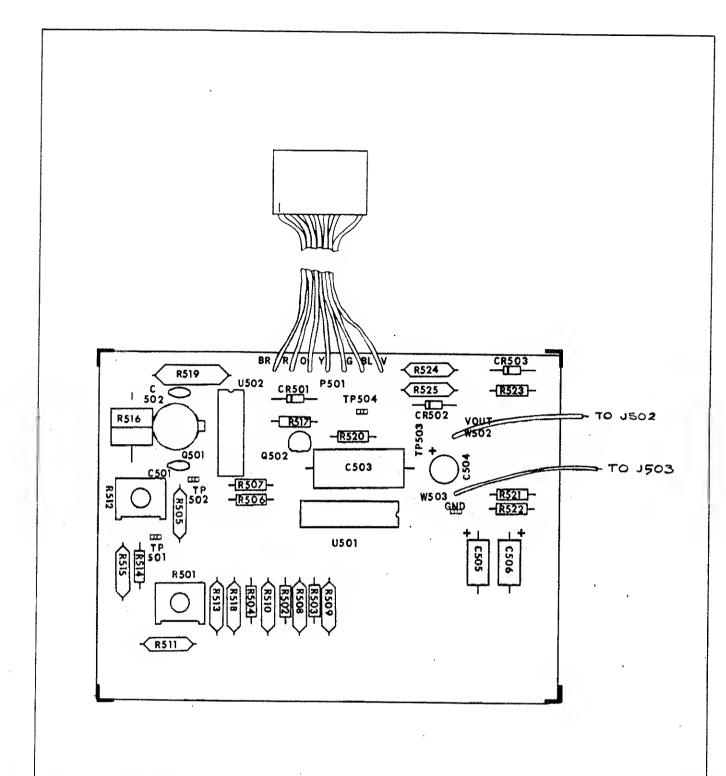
Logarithmic Analog Output Option PCB Assembly
